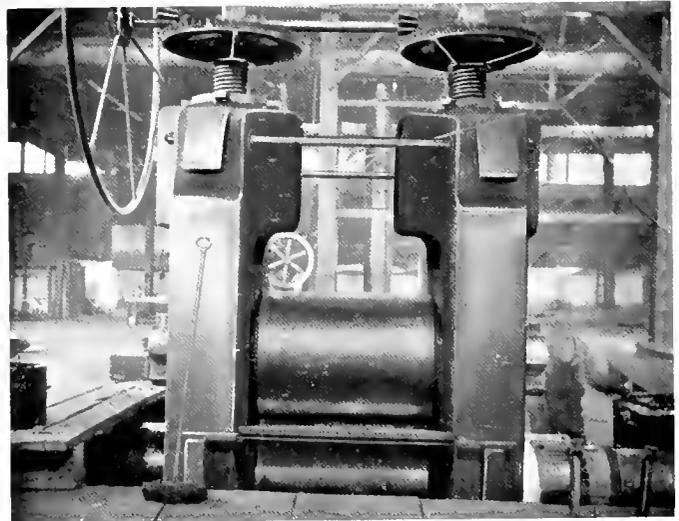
One Stand of Rolls, 30 in. Sheet Mill
